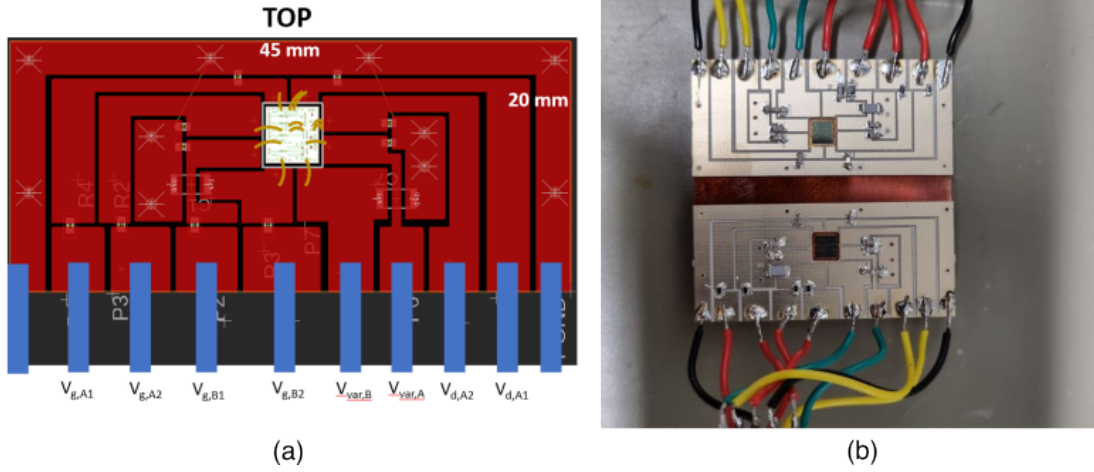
(a) Schematic representation of PCB fixture for delivering bias voltage up to the dc pads. (b) Photo of the complete fixture with two PCB boards and amplifier chip accommodated on a copper block.
